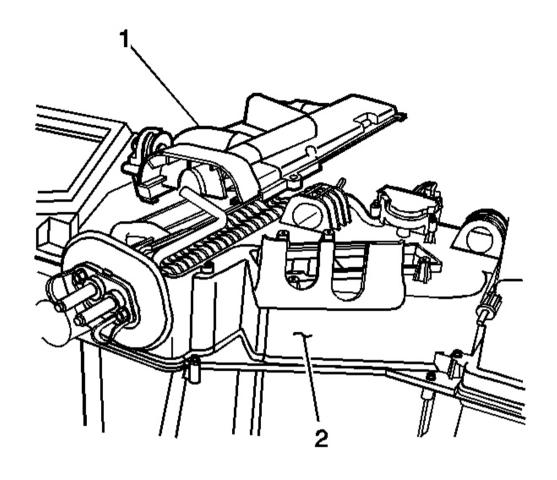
Evaporator Cover & HVAC Module Courtesy of GENERAL MOTORS CORP.
